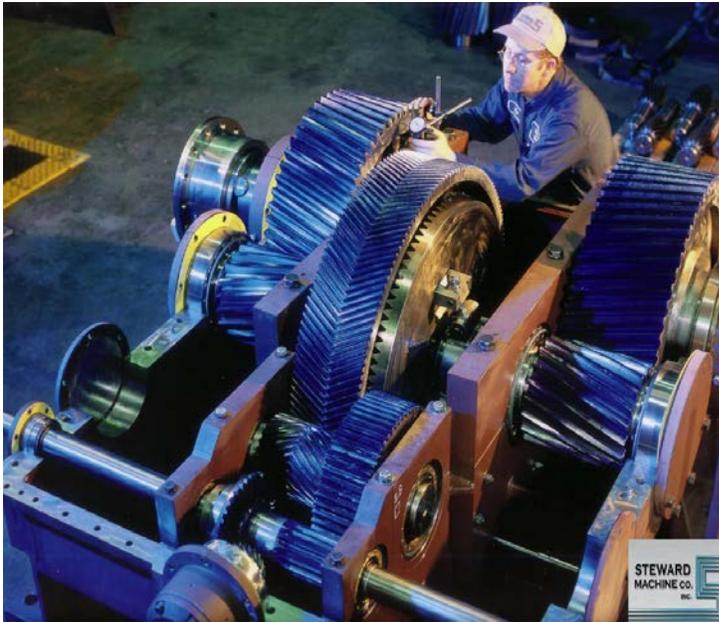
Balanced helical/herringbone gear, parallel shaft speed reducer with a differential
